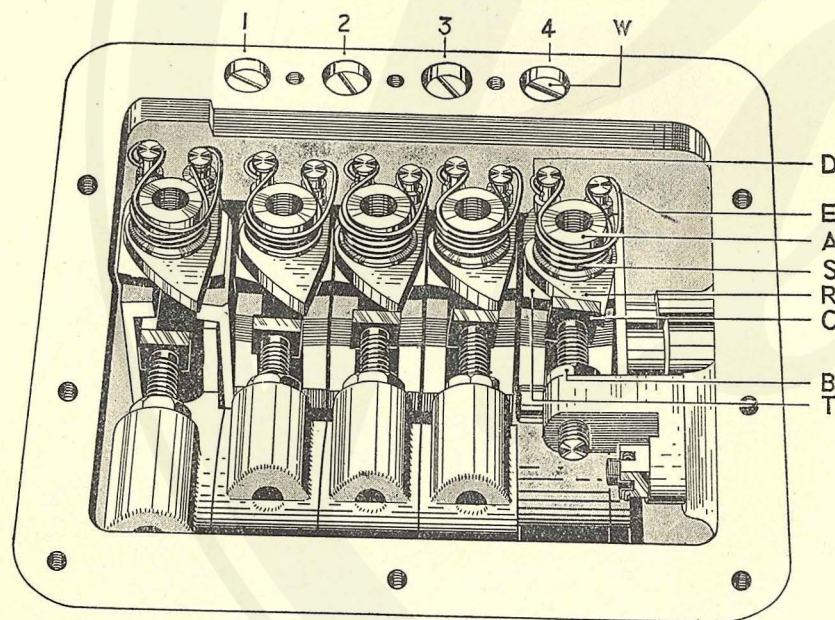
Preselector Gearbox. A, automatic adjuster nut; B, locknut; C, set screw; D, eye of automatic adjuster spring; E, loop of automatic adjuster spring; R, ring; S, automatic adjuster spring; T, table; W, tail pin. The lettering for fourth gear also applies to the other gears.
